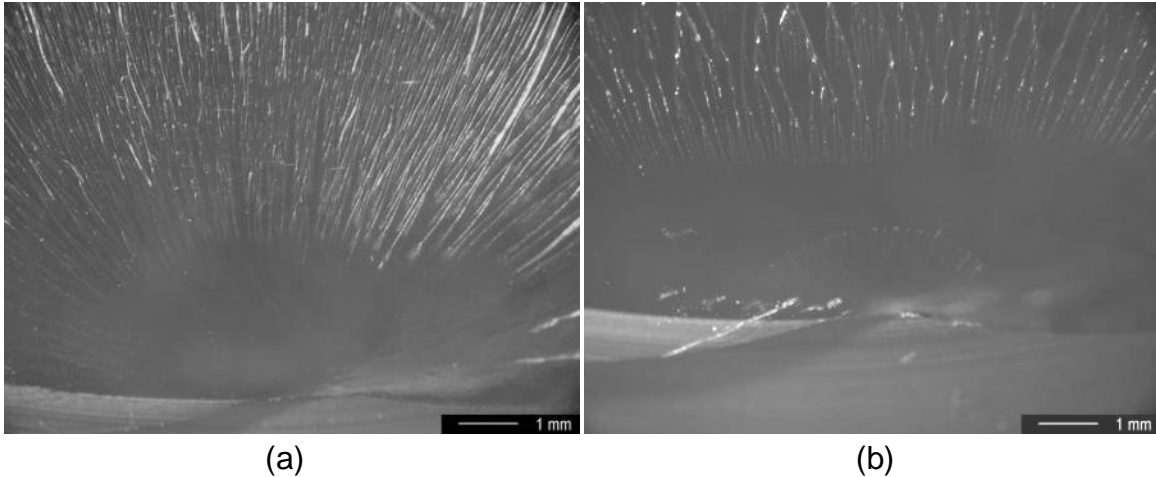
Fracture surfaces of samples GB1-6 and GB1-7.
